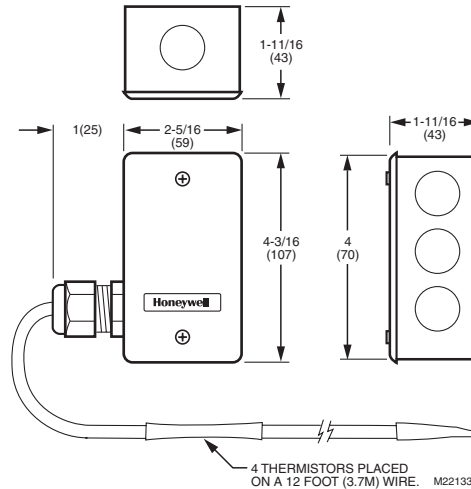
C7021J, C7023J, C7031J, C7041J Dimensions in Inches (mm).
